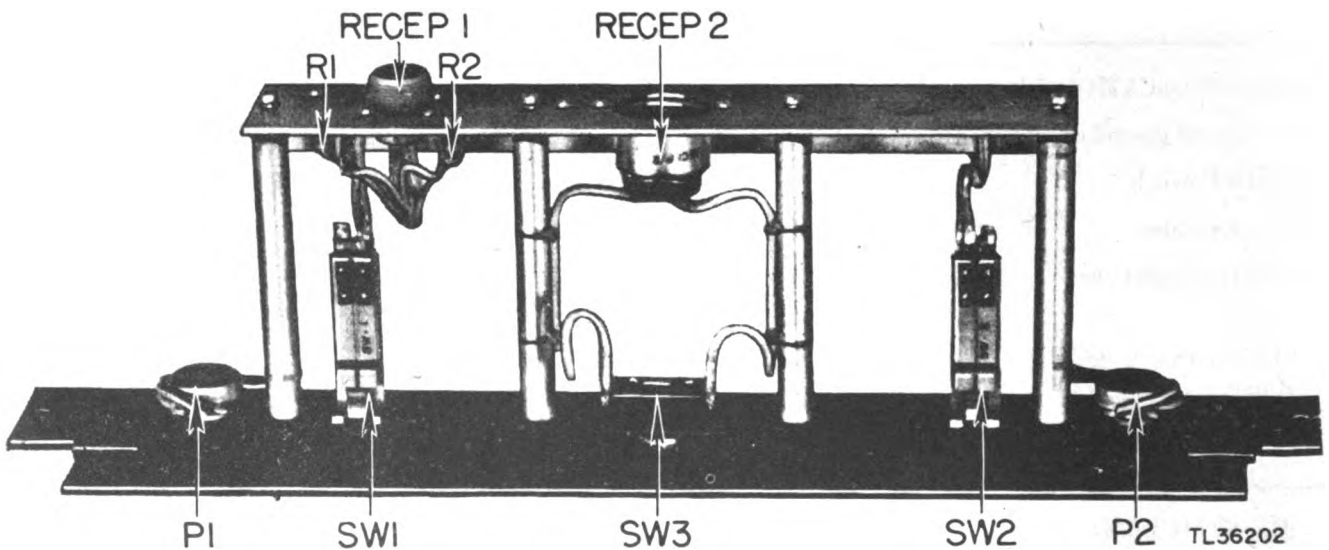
Tower Receiver Control Box C-140/MPN-1, rear view.
